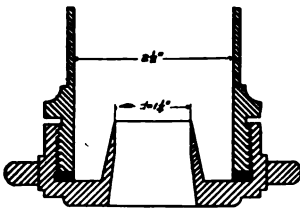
Extreme Form of Undercut Ring Nozzle.
